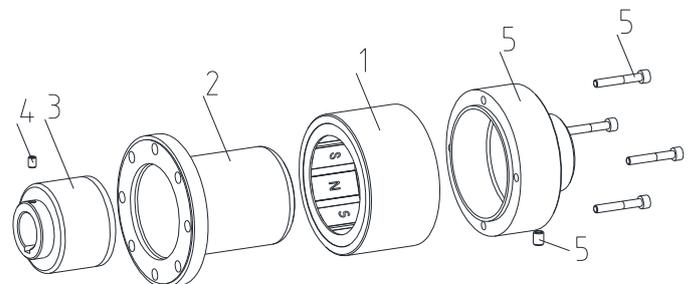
MINEX[®]-S, size SA 75/10 to SC 75/10 with one-piece containment shroud
